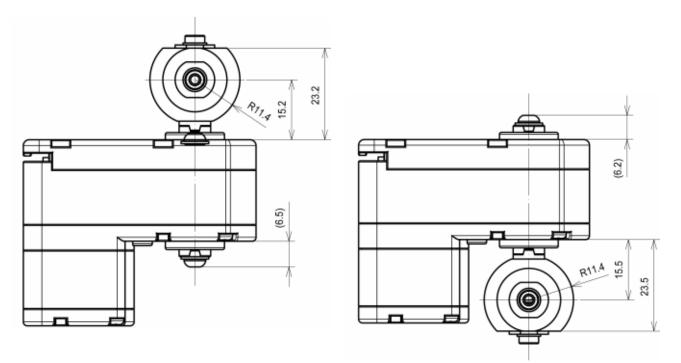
Dimensions of RS601CR and Joint Ball
